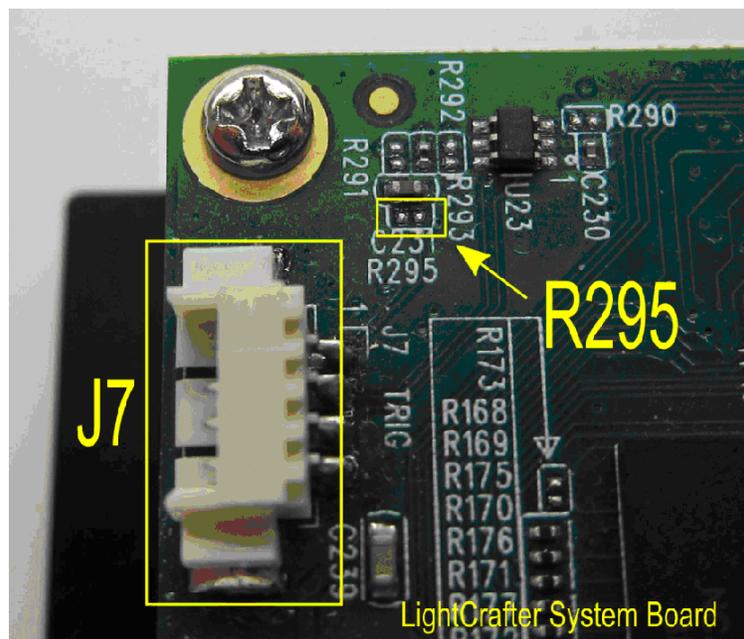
LightCrafter system board close-up, showing location of R295 and J7
